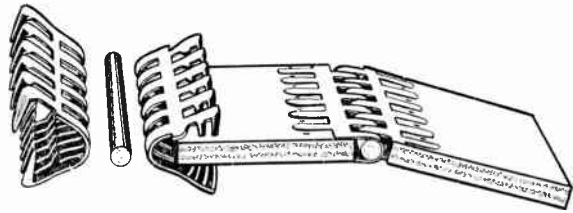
ALLIGATOR TYPE BELT FASTENER.
